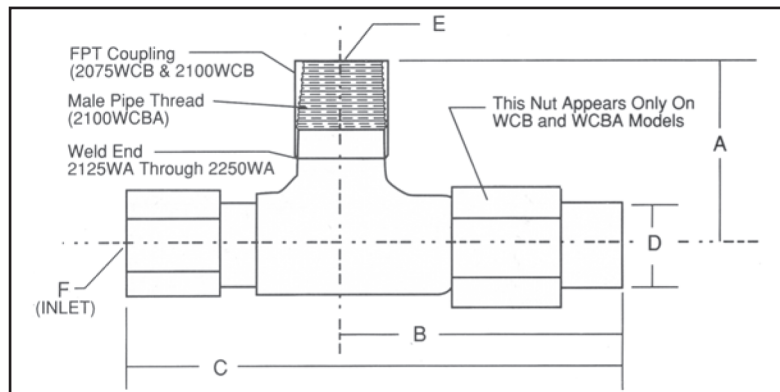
Dimensional Drawing of Steel Recirculating Injectors
